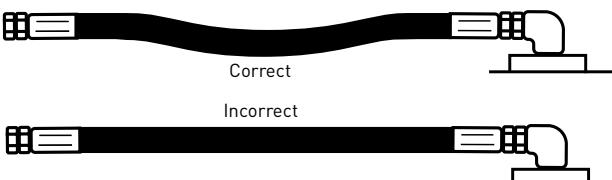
HOSE AND MACHINE TOLERANCES
